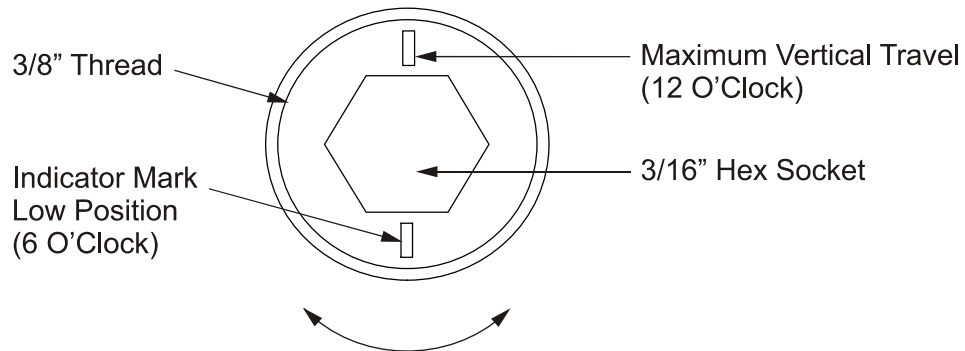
End Detail of Stud Axle Shaft and Sheave Position Indicator
